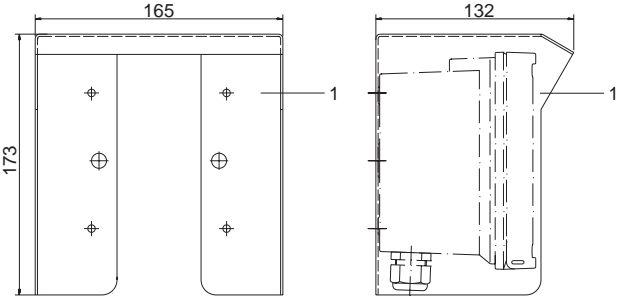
ZU 0276 protective hood for wall and pipe mounting
